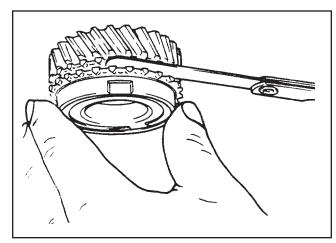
G-15. Synchronizer Ring-to-Gear Clearance
